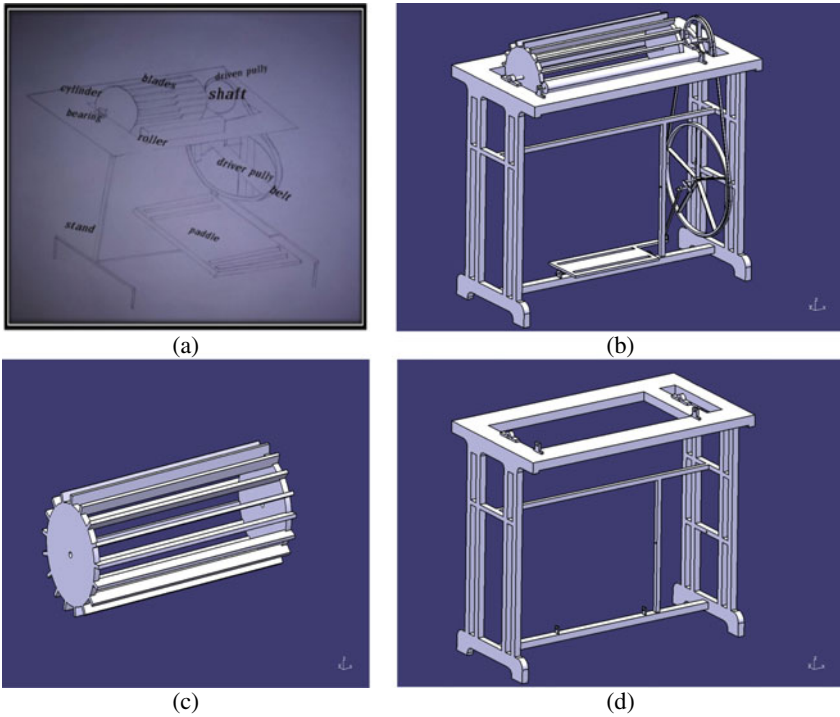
a Drawing of the manual decorticator, b isometric view of assembly drawn in Creo 2.0, c isometric view of the drum, d isometric view of the mounting table
